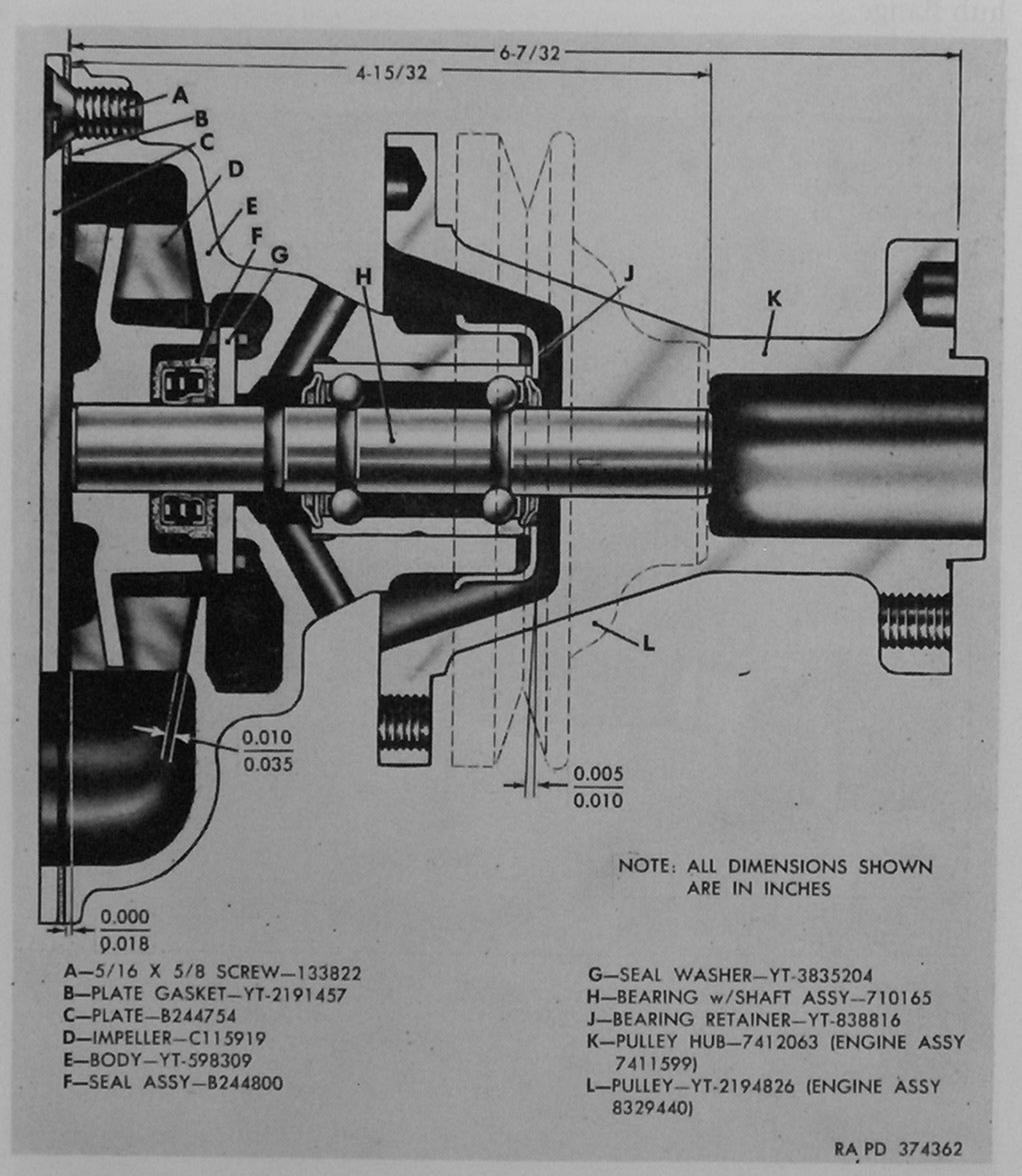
Water pump assembly—engine assemblies 7411599 and 8329440.
